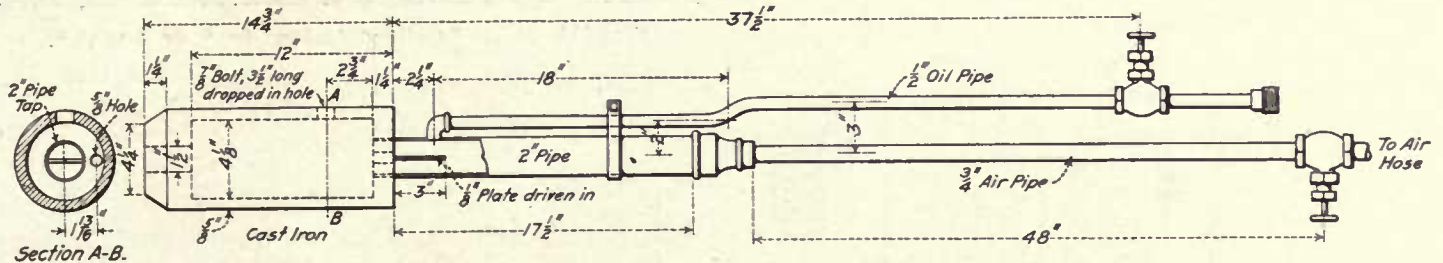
Crude Oil Burner Used for Welding Locomotive Frames.
